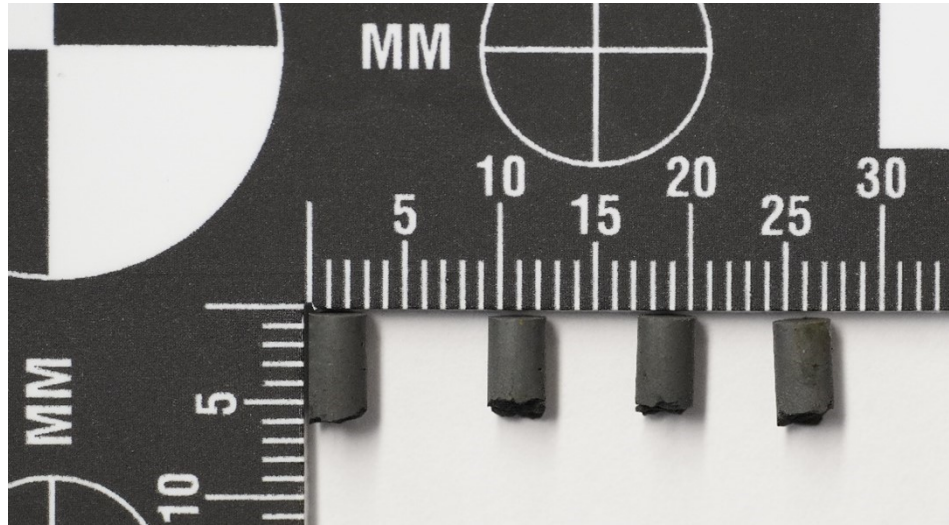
Pellets of ball milled 304L+Mo after sintering
